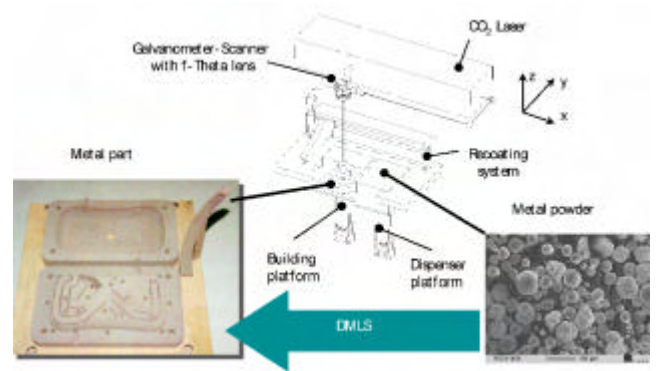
Working principle of DMLS(Direct Metal Laser Sintering)<sup>(5)</sup>
